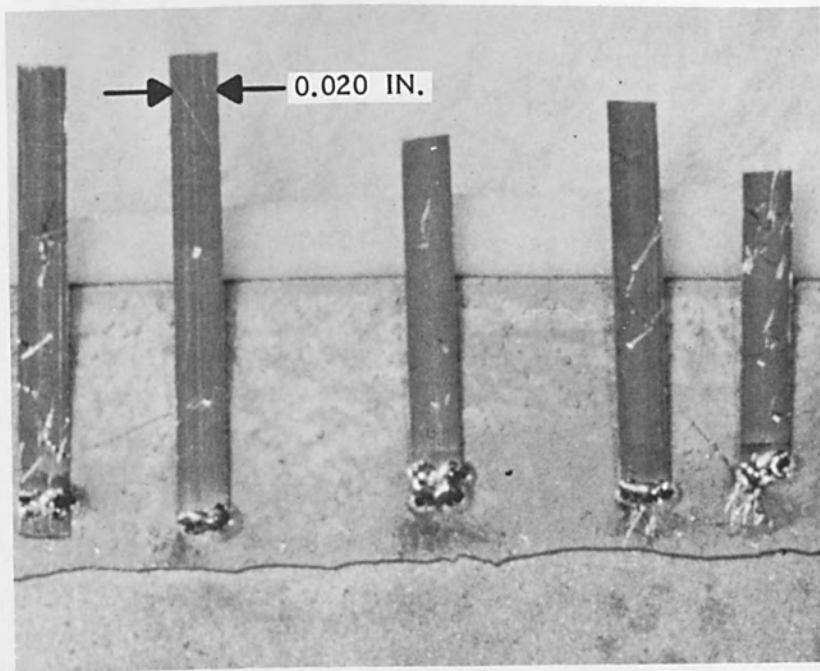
Gold and Kovar Leads Welded To 0.0002-in. Nickel
